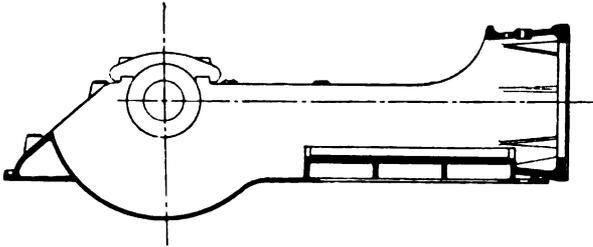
Ehrhardt & Sehmer Frame Casting.
